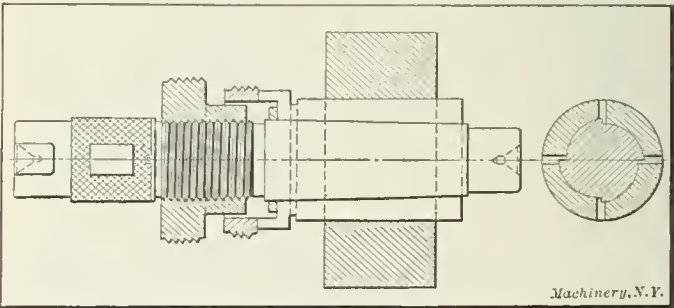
Sectional View of Bergstrom Expansion Mandrel
